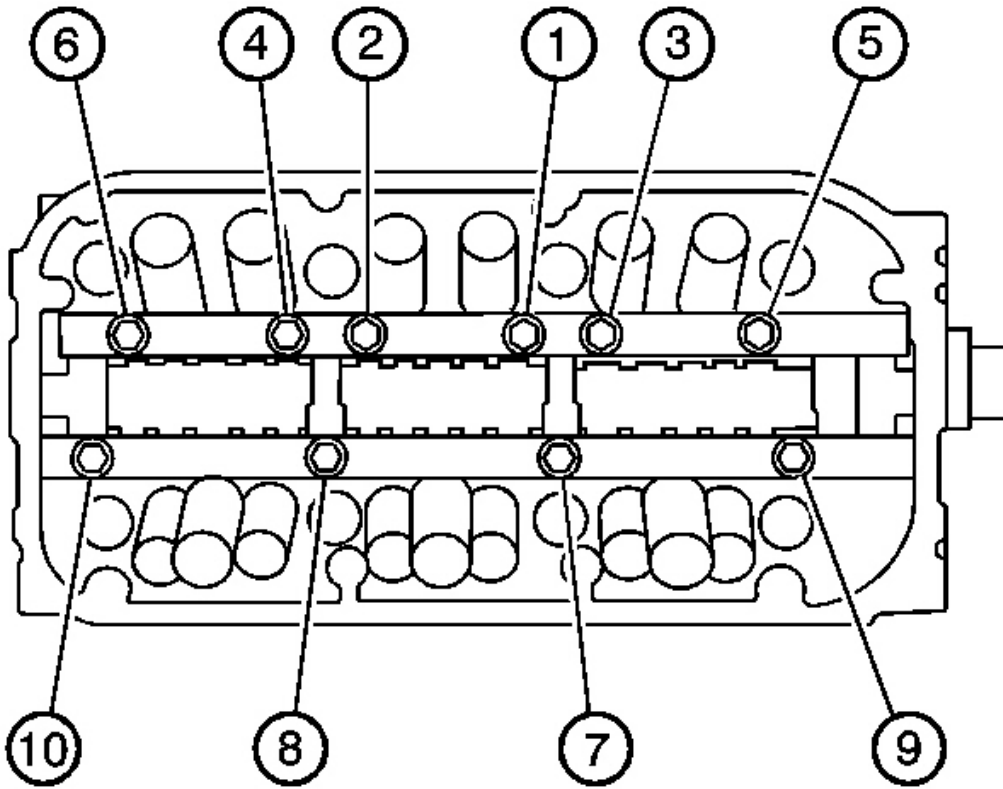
Identifying Cylinder Head Rocker Shaft Bolts
